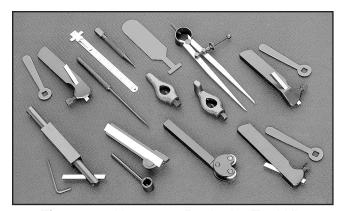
H5868 20 Pc. Lathe Tool Kit.
